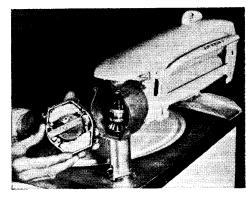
Agitator gearbox with cover removed and oil drained off. Fig. 6 (below)—Wringer gearbox showing gear selector
